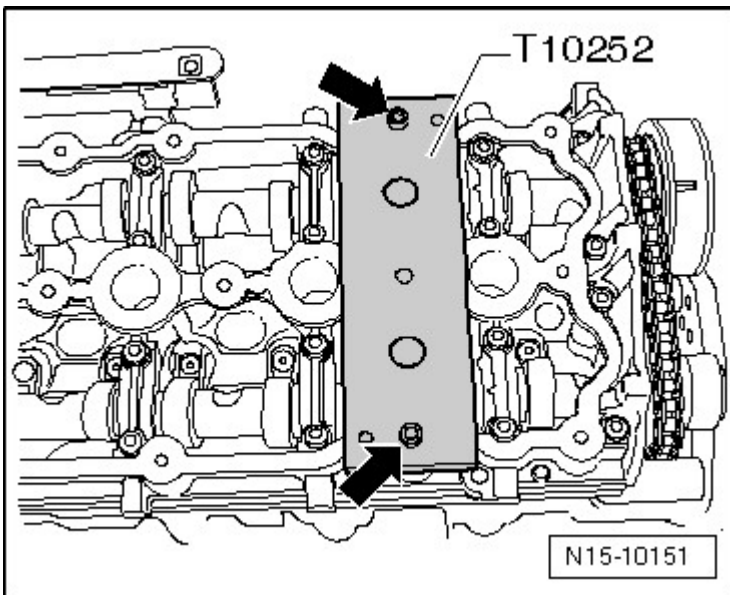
Identifying Camshafts Secured Using Camshaft Locator T10252
